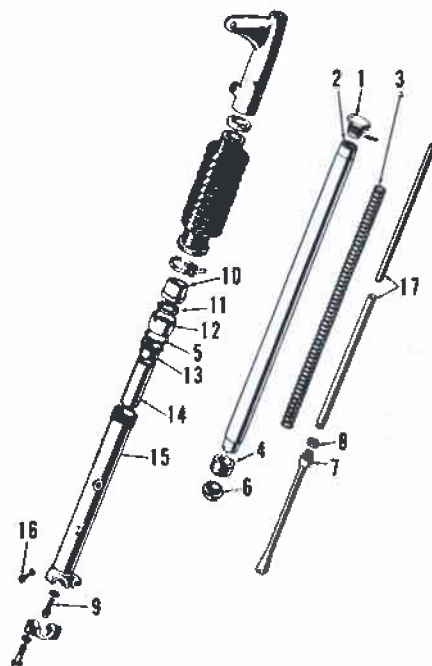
Exploded view of the front suspension used on early models (before serial number DU5825). Refer to Fig. TM4-15 for later type.
